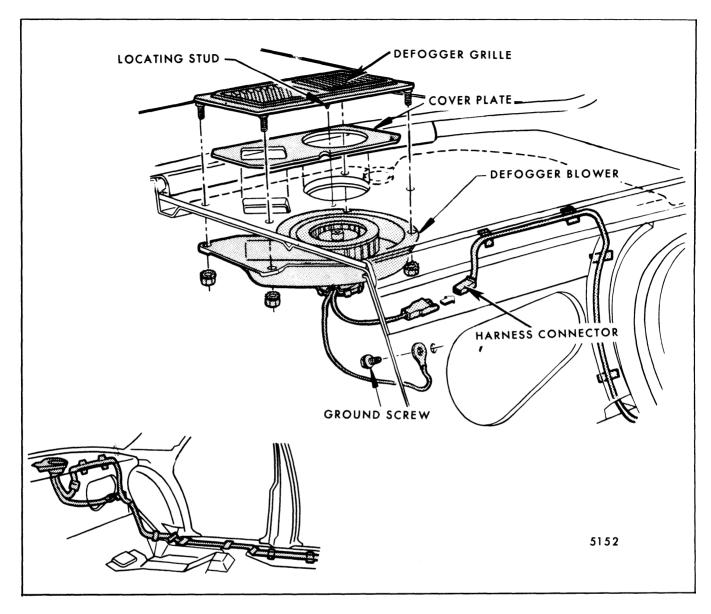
Typical Defogger Blower Installation - "B" Style Shown - Other Styles Similar
